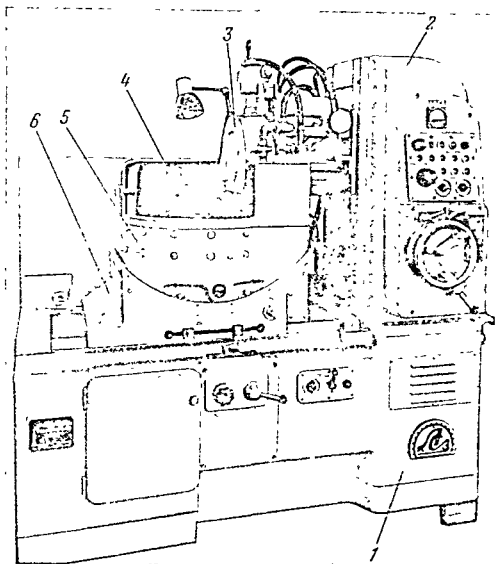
Horizontal-spindle rotary-table surface grinding machine, model 3E710:
